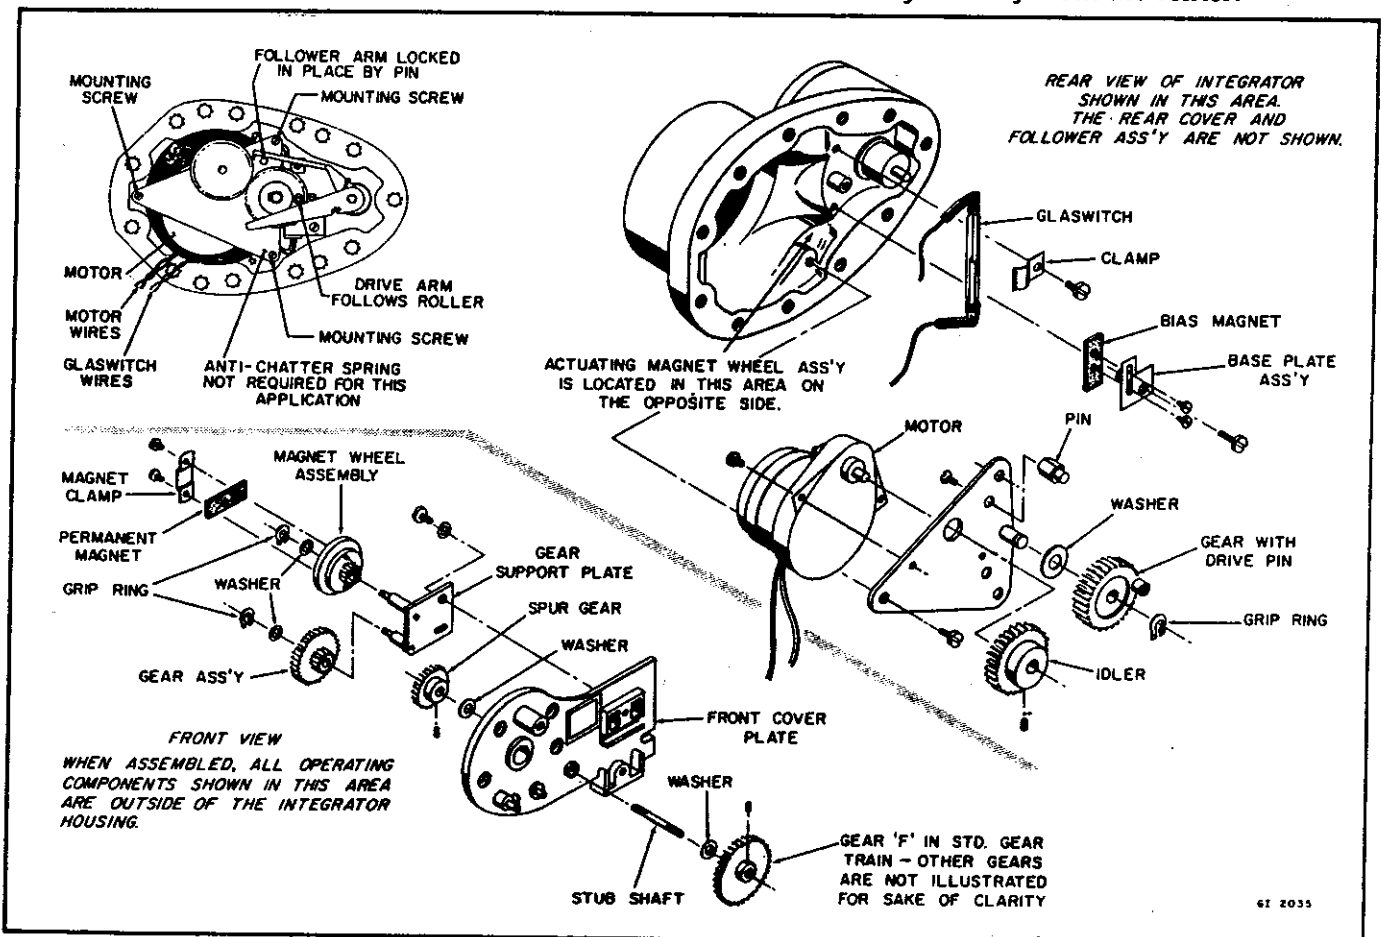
EXPLODED VIEW OF GLASWITCH COMPONENTS
